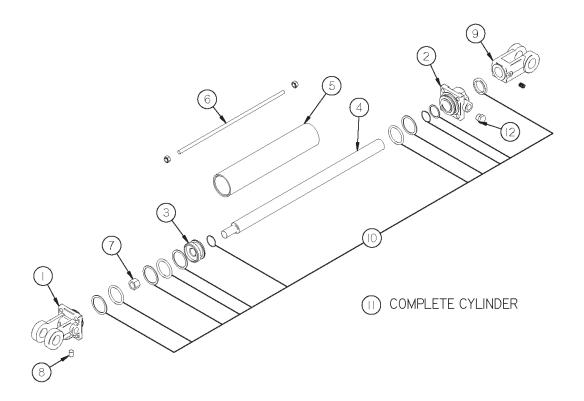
FRONTIER MODEL WR1214/WR1216 HYDRAULICS
